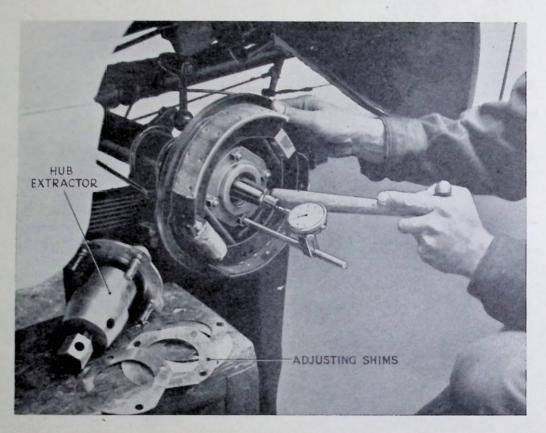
Fig. I. Method of Setting Clearance in Rear Hub Bearings.
